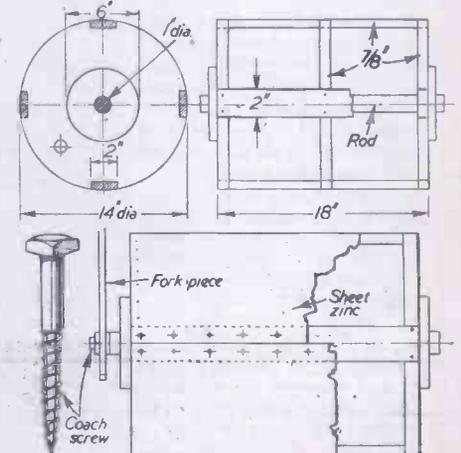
Alternative type of roller, made from wood and sheet metal.
